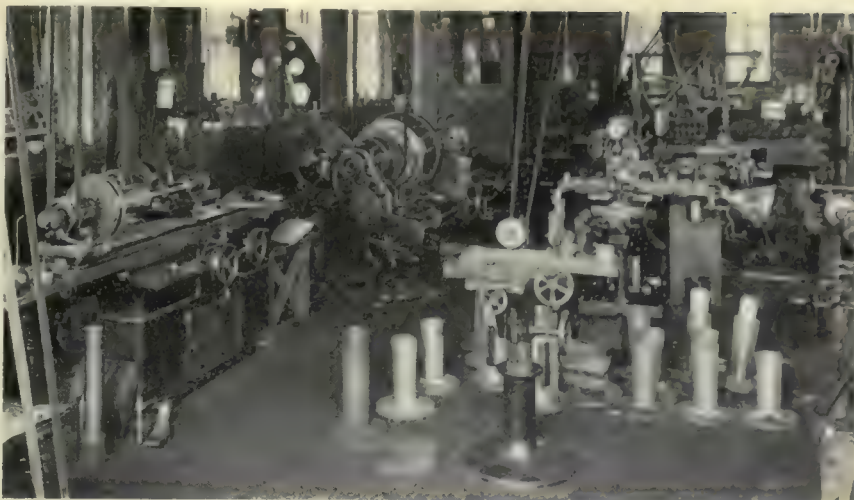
VIEW IN TOOL ROOM SHOWING GRINDING.
